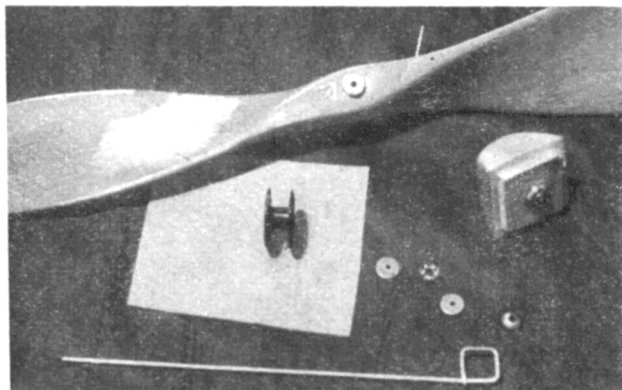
All the units ready for assembly : propeller and nose-block with bushes in place; propeller shaft with one end bent into a square for the free-wheelclutch; flat washers and ball-race; cup-washer; bobbin.
